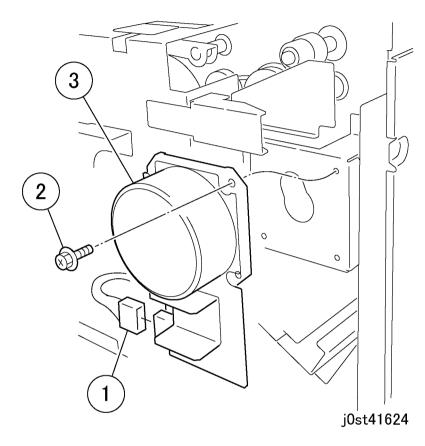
Removing the Finisher Drive Motor (j0st41624)
